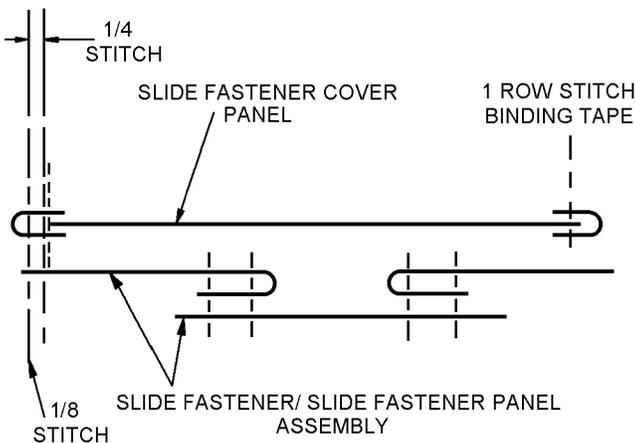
12-Man Survival Kit Bag Slide Fastener Cover Assembly
